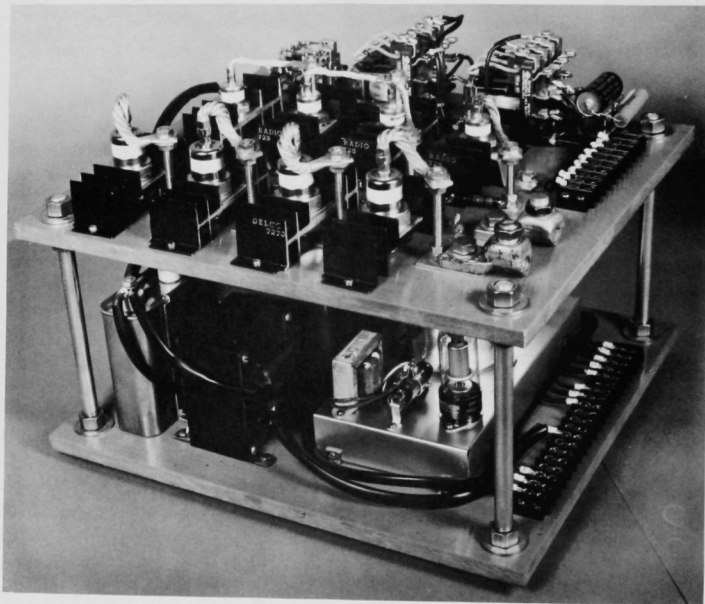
Arc Starter for Remote Spot Welding of EBR-II Fuel Elements
